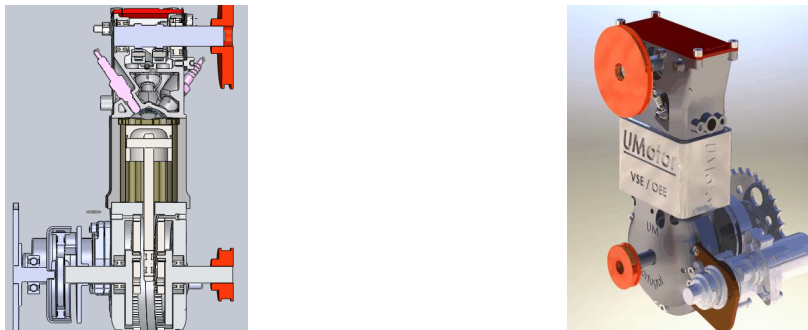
Section view (left) and rendered view of the full assembled engine (right).
